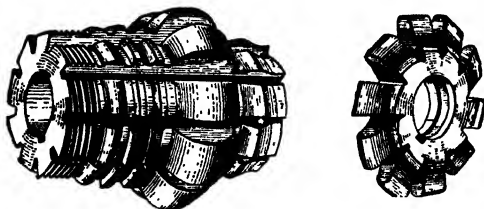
Formed cutters. In (a) is shown a very special formed cutter, and in (b) a gear cutter.
